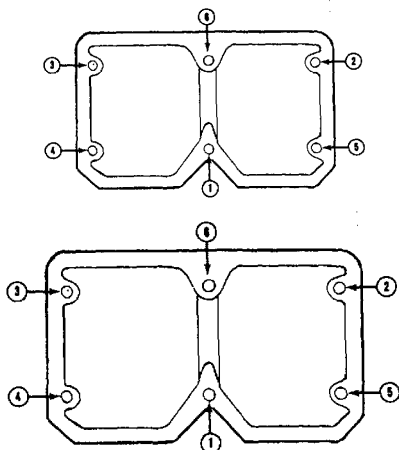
, (N11463). Rocker lever housing torquing sequence
